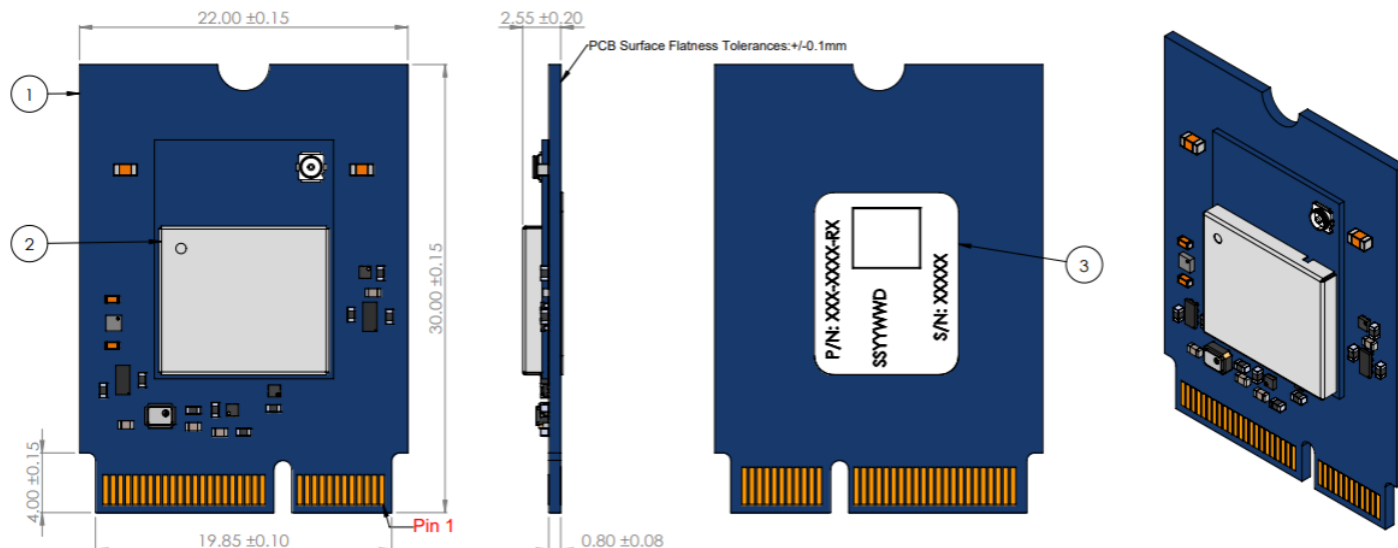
Sona TI351 M.2 2230 Mechanical Drawing
